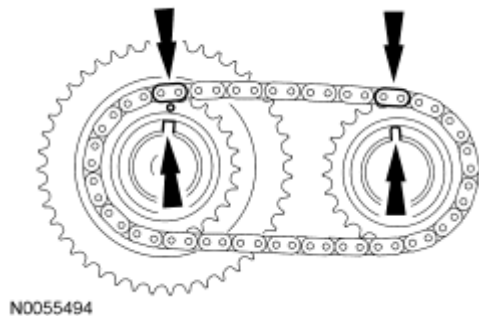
Aligning RH Exhaust Camshaft Sprocket & RH Secondary Timing Chain Colored Links With Timing Marks
